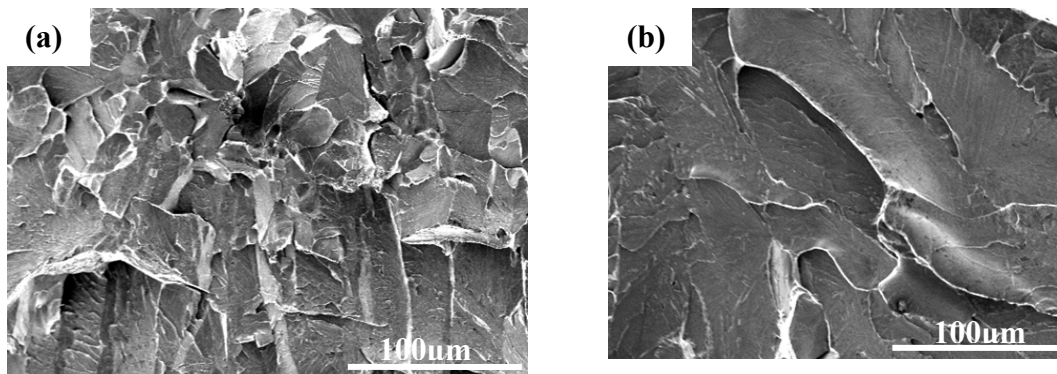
Tensile fractographs in powder mixture treated welds in relation to conventional weld: (a) powder mixture treated weld and (b) conventional weld
